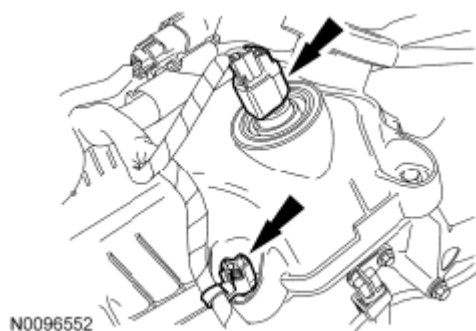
Locating RH VCT Electrical Connector & Wiring Harness Retainer From Valve Cover Stud Bolt
